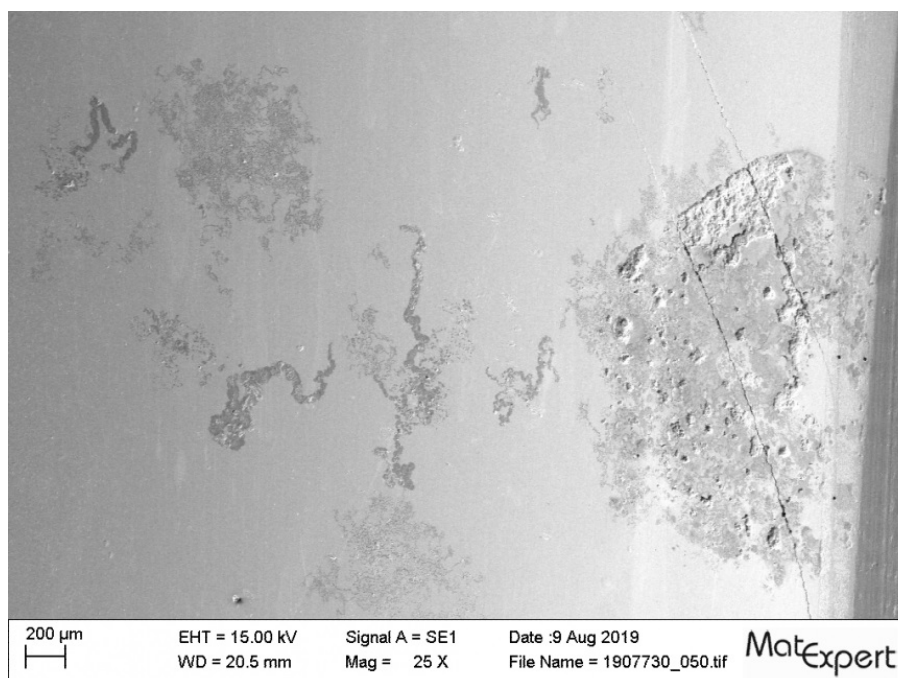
Bearing no. 4, outer-race bearing track – filiform corrosion and pitting with cracks.
